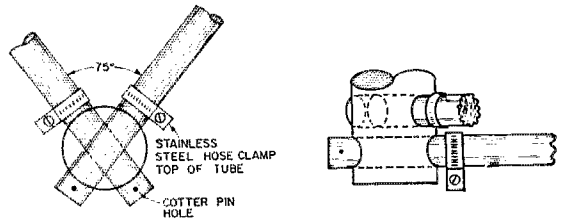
This drawing shows the method of mounting the element to the boom. A cotter pin is used on the under side of the boom and a hose clamp on the top to hold the element securely to the boom.
